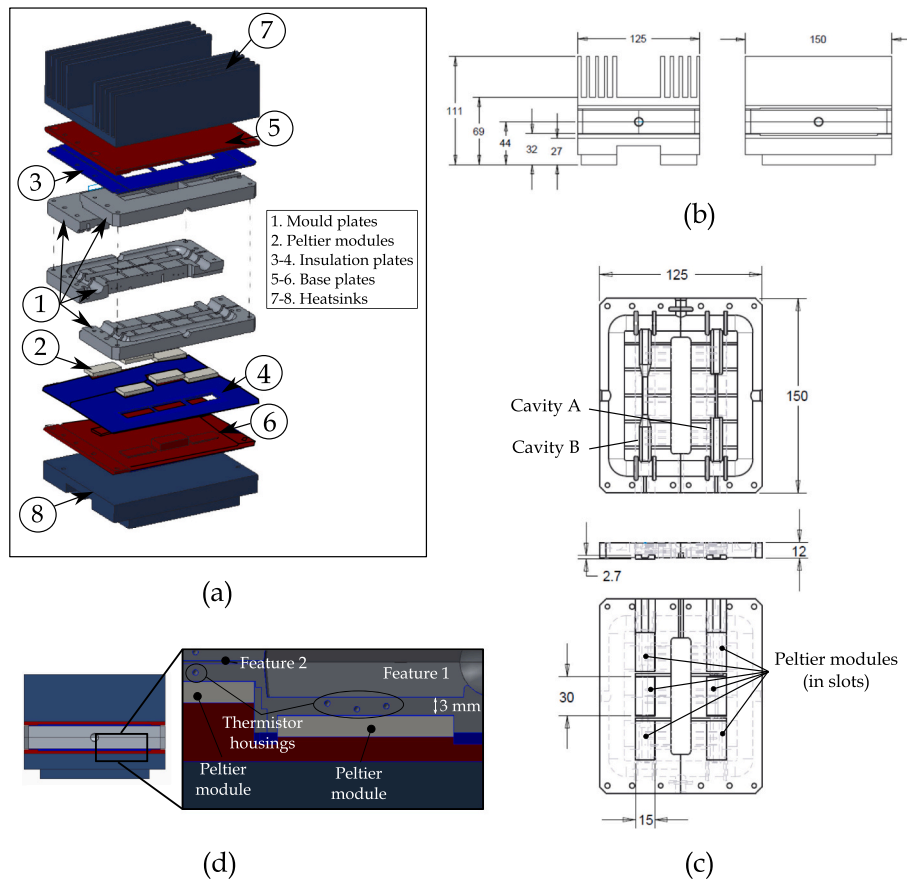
Prototype of the novel mould tool. (a) Exploded view of the assembly. (b) Main dimensions. (c) Mould cavity, main dimensions. (d) Cross section of the mould, showing Peltier modules and thermistor housings locations.
